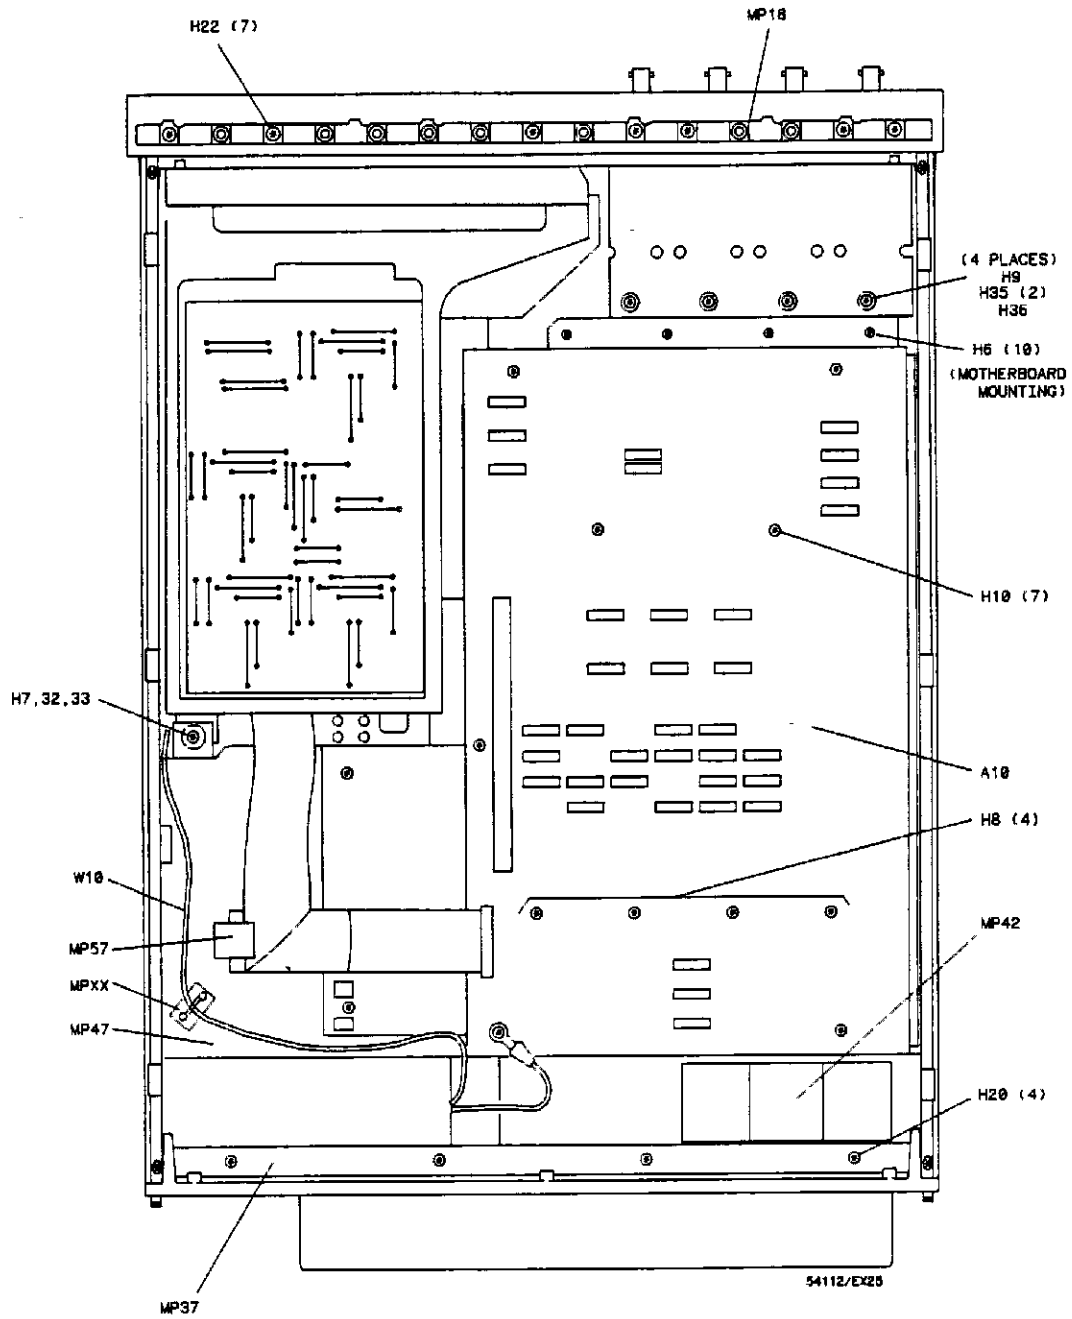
Mainframe Parts Locations (sheet 3 of 7)
